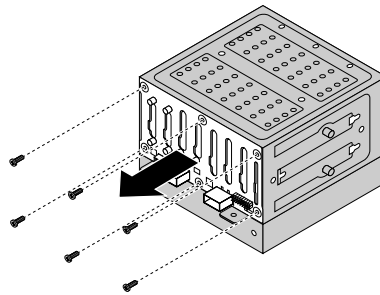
Removing the 2.5-inch hot-swap hard disk drive backplane
